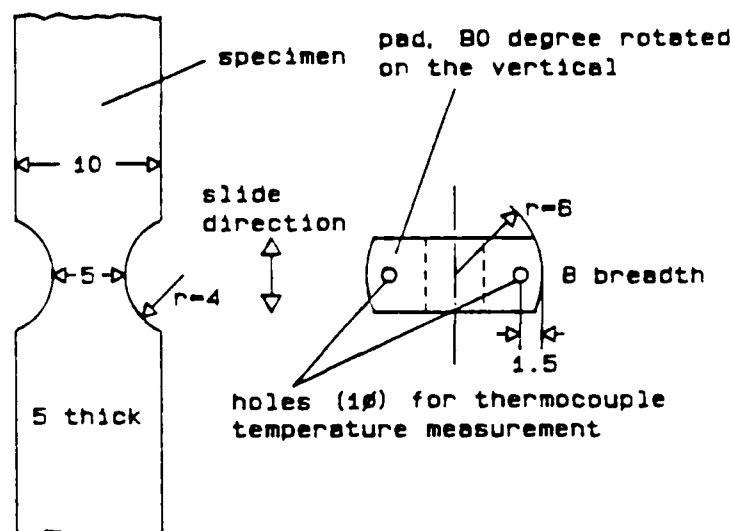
Shape and dimensions of the fretting fatigue specimen and the fretting pad used for investigation (dimensions in mm).
